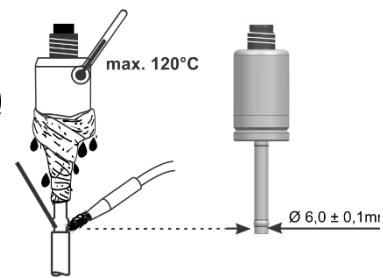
/ Рис. 5: PT4-Mxx Series Cable Assembly
